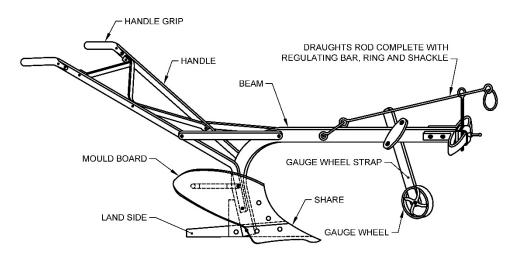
NOMENCLATURE OF MAIN PARTS OF ANIMAL DRAWN MOULDBOARD PLOUGH, FIXED TYPE (SHORT BEAM)
